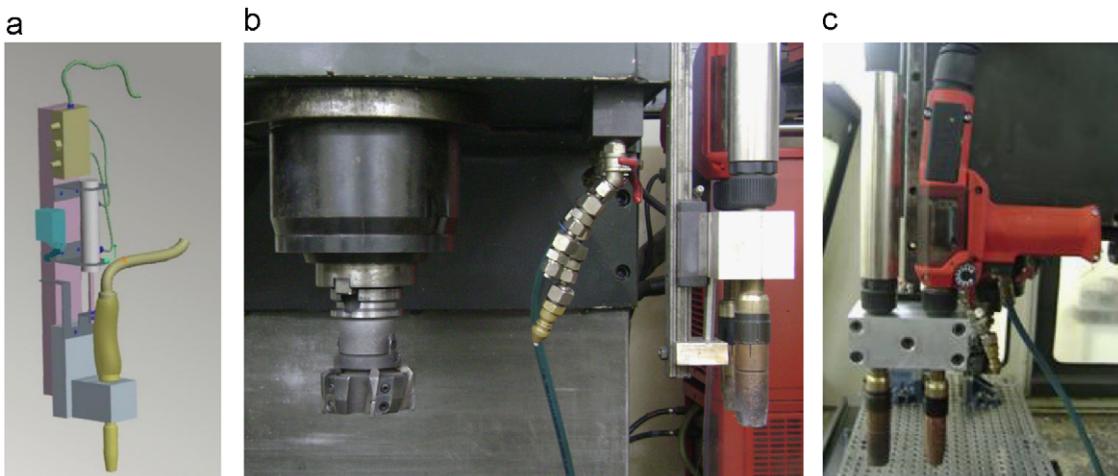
Two weld-deposition torches mounted near the spindle. (a) CAD model of the pneumatic arrangement, (b) Front view of the modified torch mounting and (c) Side view of the modified torch mounting.
